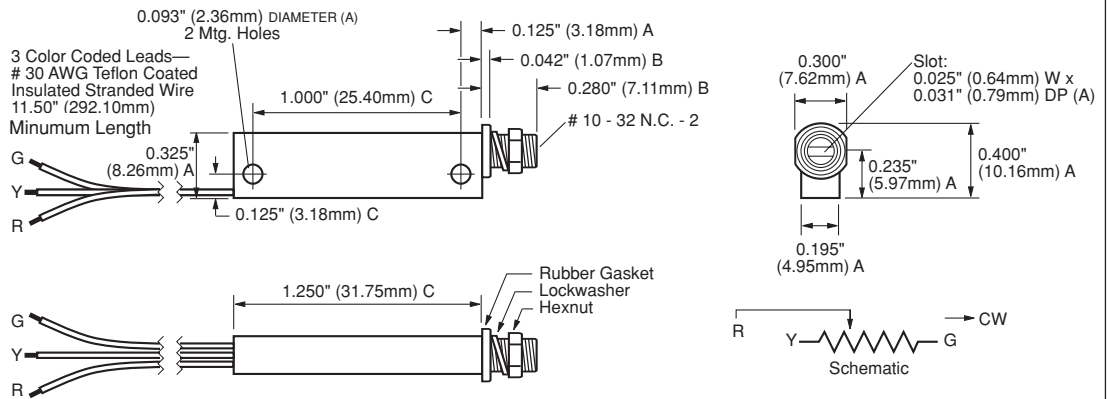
SCHEMATIC AND DIMENSIONS in inches (millimeters)
